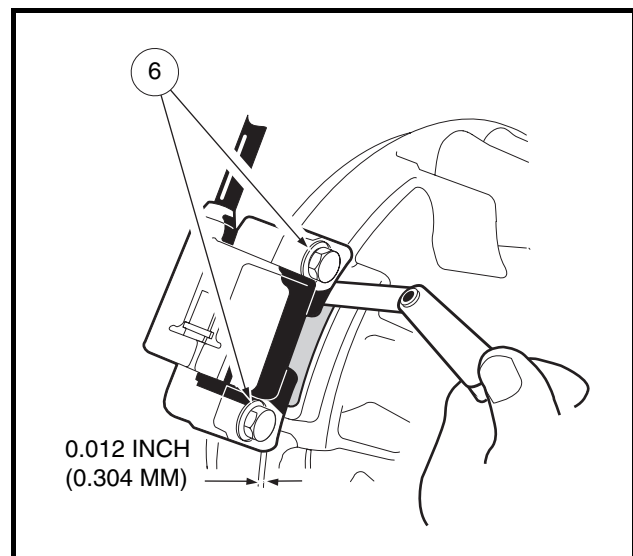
Mount Ignition Coil Using Feeler Gauge
